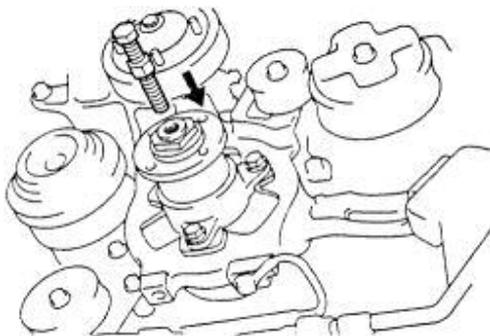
Install a special service bolt and nut to the front of the driveshaft
